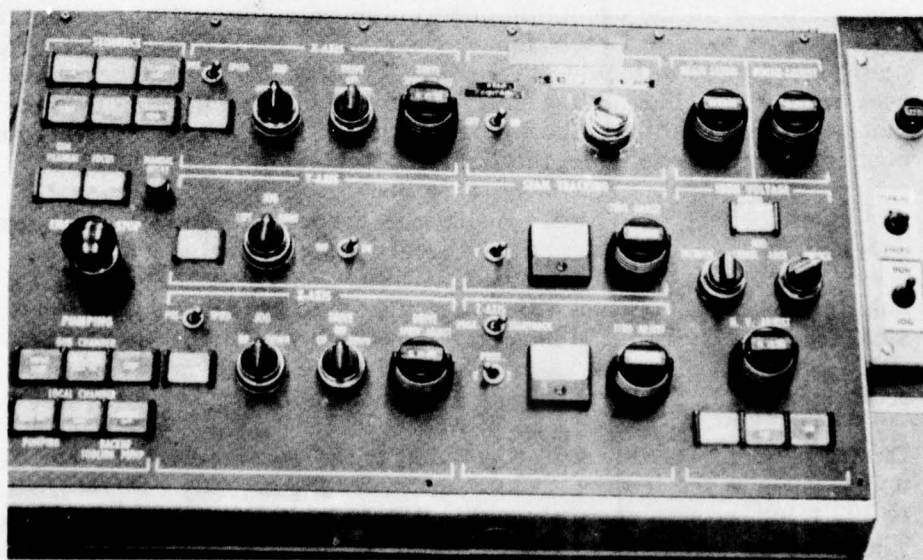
Control Station-Junction Box for the Flat Plate Welding Fixture
